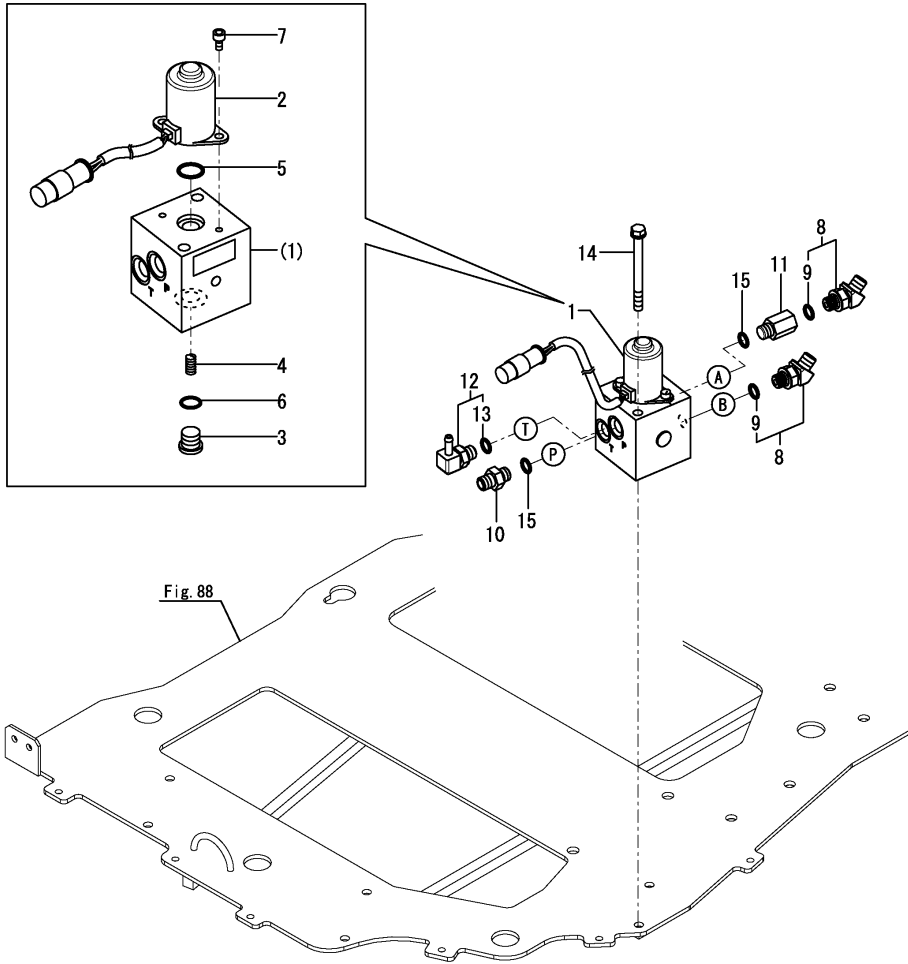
REMOTE CONTROL VALVE(TRAVEL)
